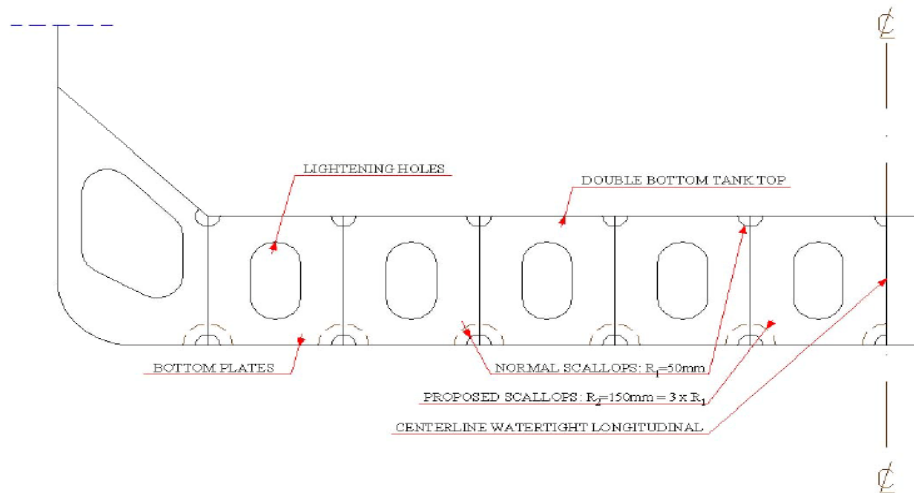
PROPOSED TYPICAL SCALLOP ARRANGEMENT FOR SOLID FLOORS IN WATER BALLAST DOUBLE BOTTOM TANKS
